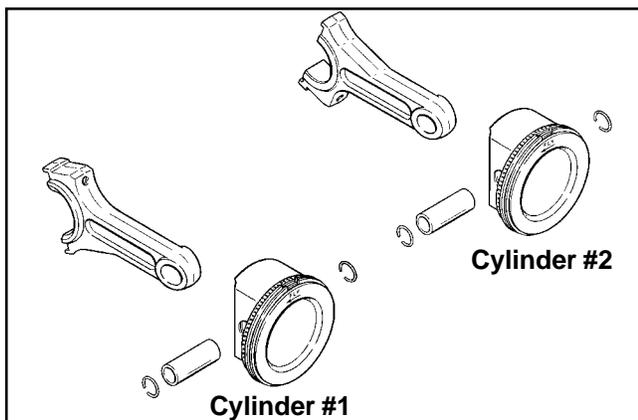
Piston, Connecting Rod and End Cap Detail.
